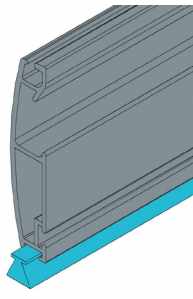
Installing the ISE18 brush insert into the M-ES12×57 end slat
